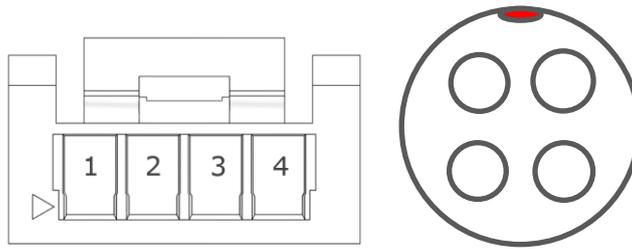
Numbering 4-pin connectors; left Molex (cable entry view), right ODU (solder cup view).
